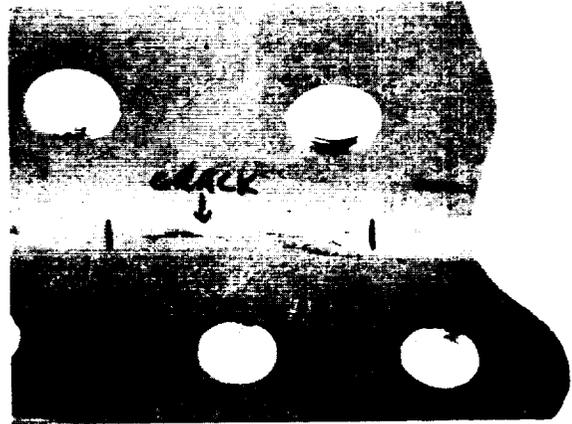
Crack in the radius of a machined tank-truss fitting made of type 7075-T6511 aluminum alloy.
